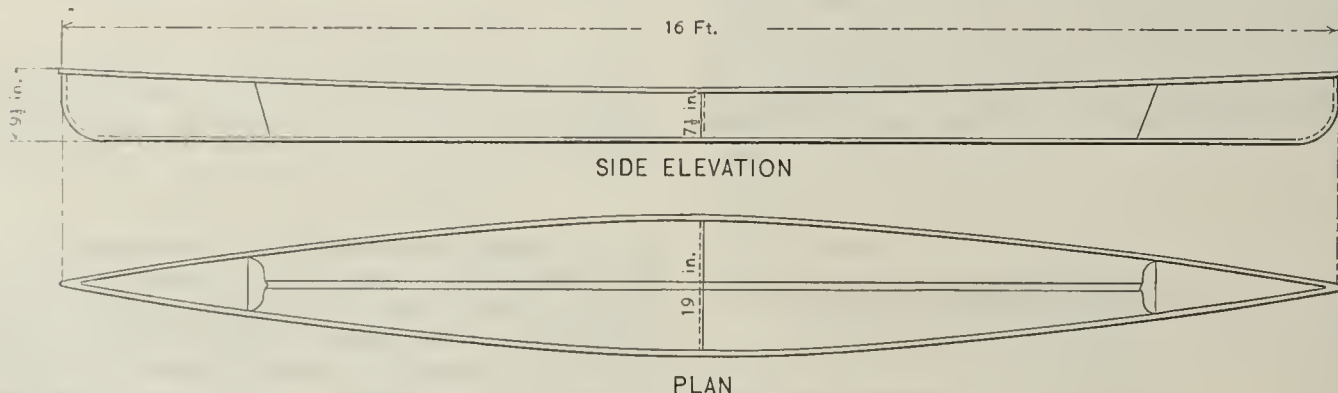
Plan and Side Elevation of Two Parts Connected.
